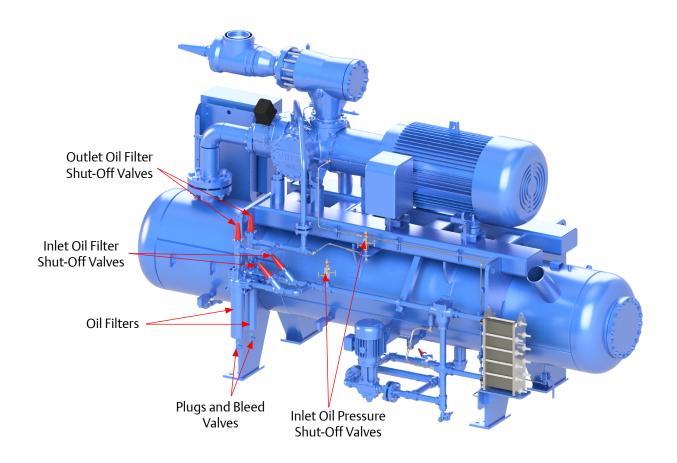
Dual Oil Filter (3677A Oil Filter Housings Shown)
